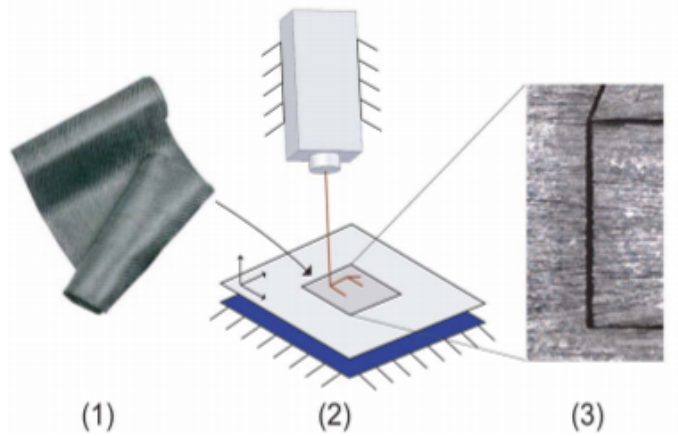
Laser machining part of SCM fabrication. Copyright Koh, Je-Sung and Cho, Kyu-Jin
